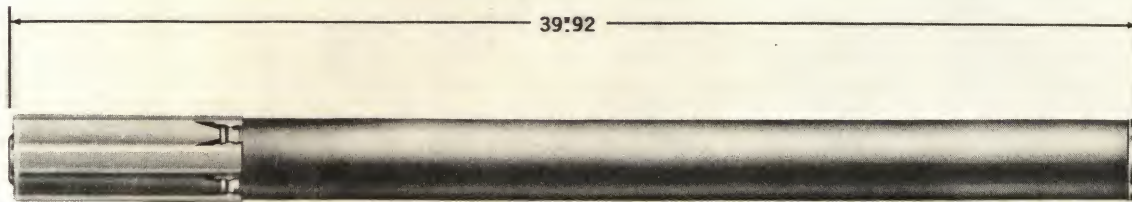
2.75-Inch Rocket Motor, External View, with Fin Retainer in Place.
